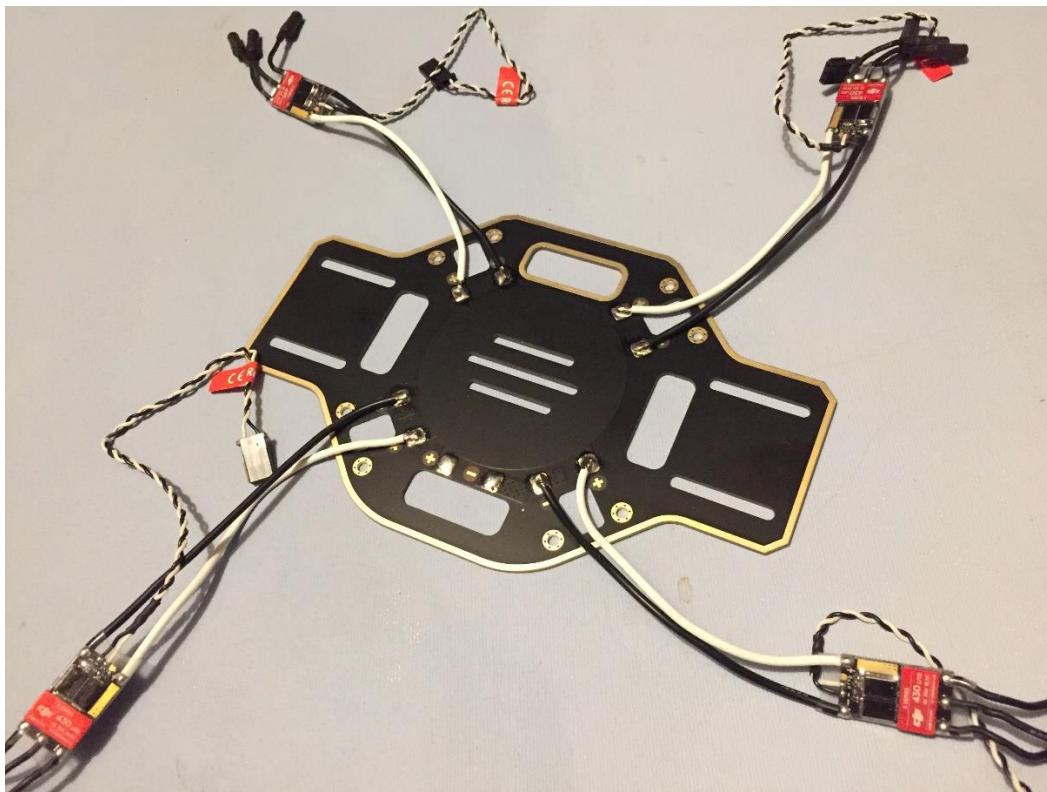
The ESC wires were cut to length then soldered to the base plate.
